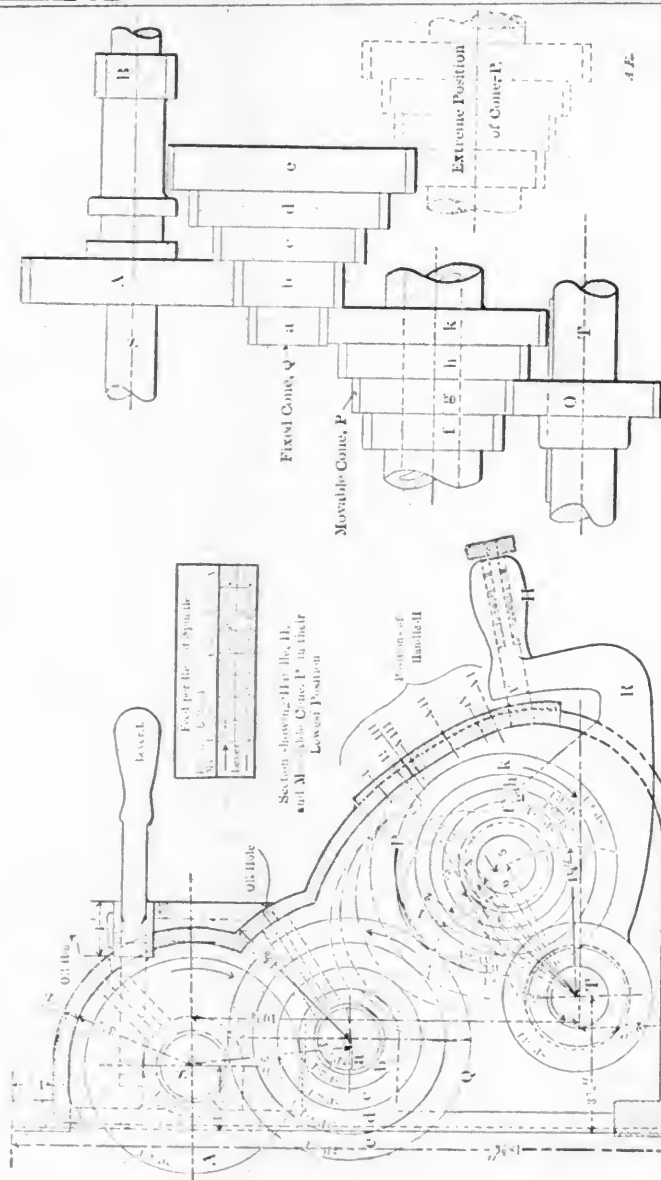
CROSS SECTION OF GEAR BOX, SHOWING ARRANGEMENT OF GEAR CONES.
